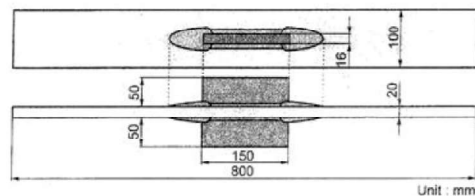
Shape and size of boxing fillet welded joint specimen
